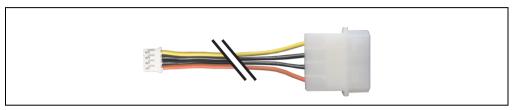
APC810 internal supply cable - 5CAMSC.0001-00
